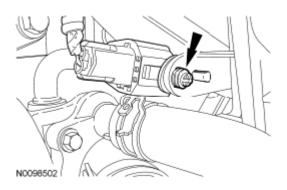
Locating Knock Sensor (KS) Electrical Connector Of Intake Manifold Courtesy of FORD MOTOR CO.
